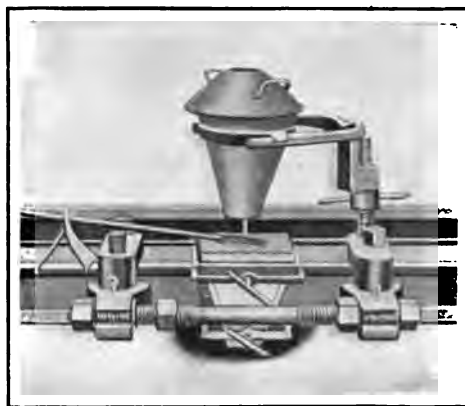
COMPLETE WELDING OUTFIT FOR THE USE OF THERMIT
